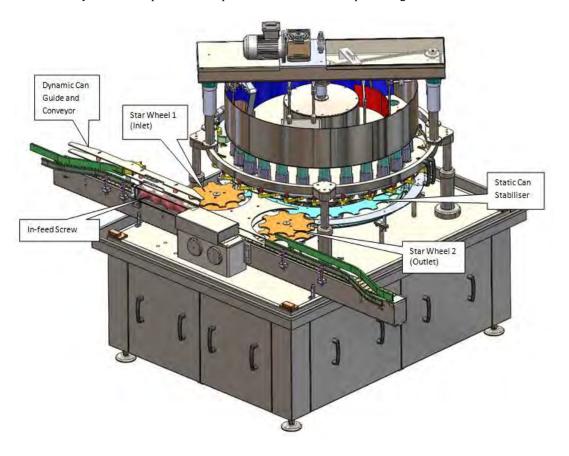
Container Flow Design in Tuna Flake Filling Prototype Machine
